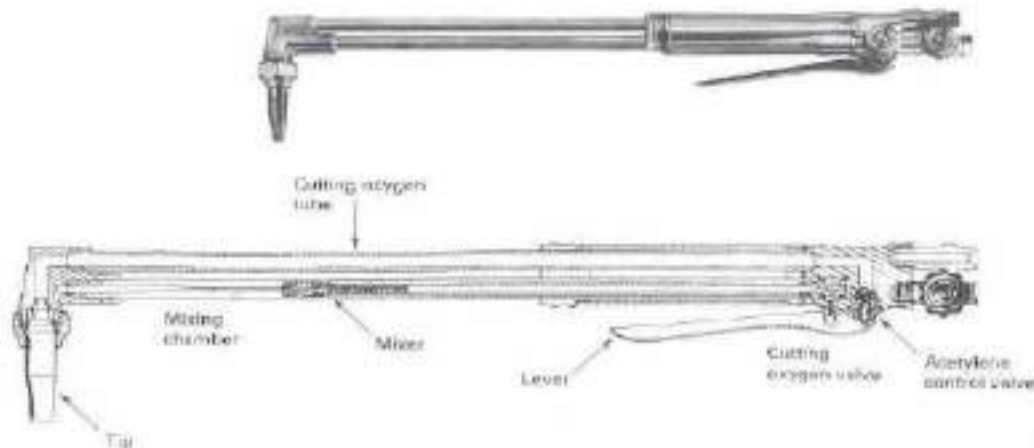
Typical oxyacetylene cutting torch and cross-sectional schematic. (Courtesy of Welder Equipment Company.)
